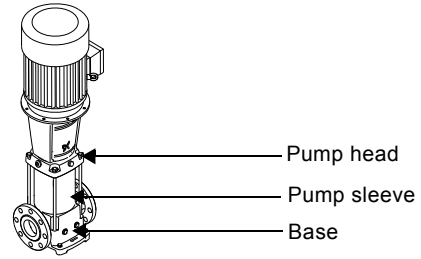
Hot or cold surfaces on a CR, CRI, CRN pump
